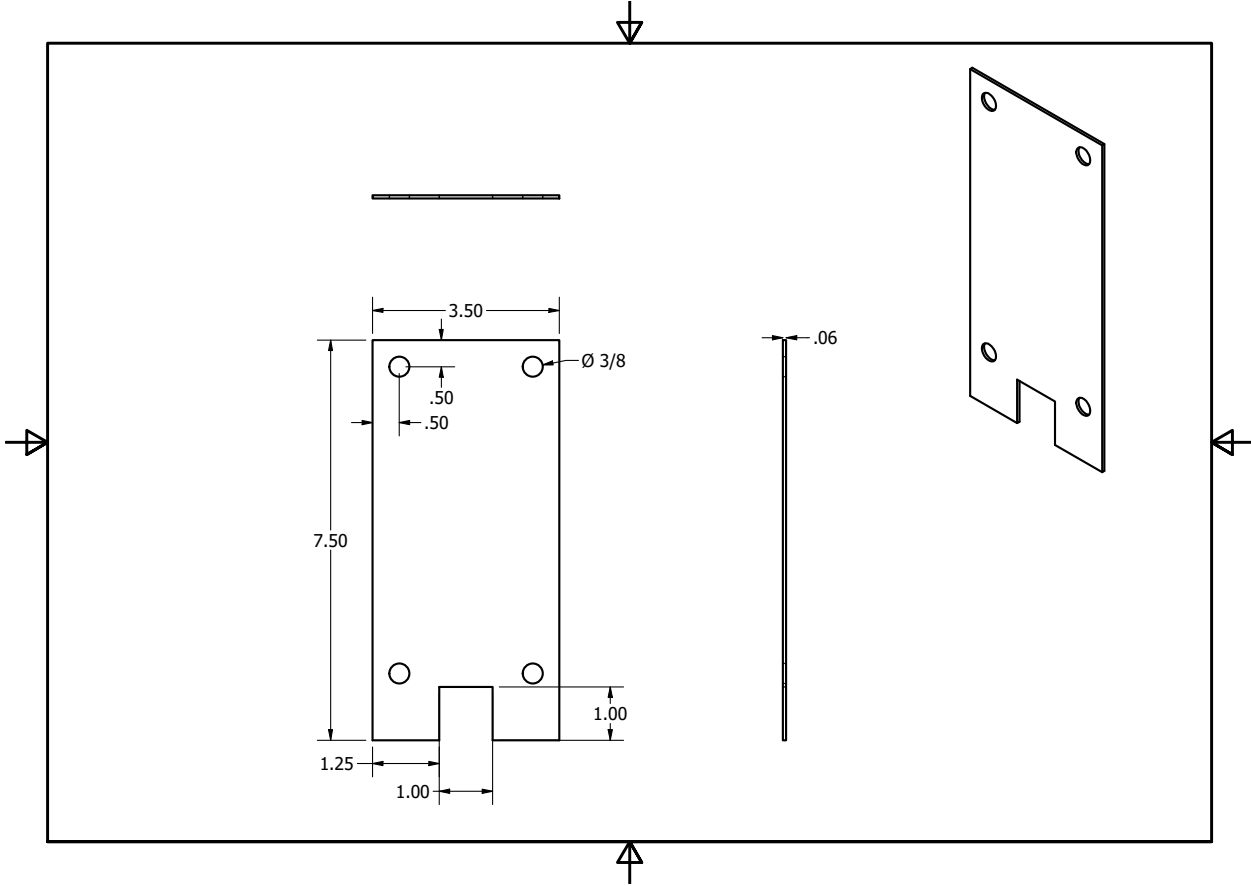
Dimensioned Drawing of Intermediate Plates for Shear Apparatus
